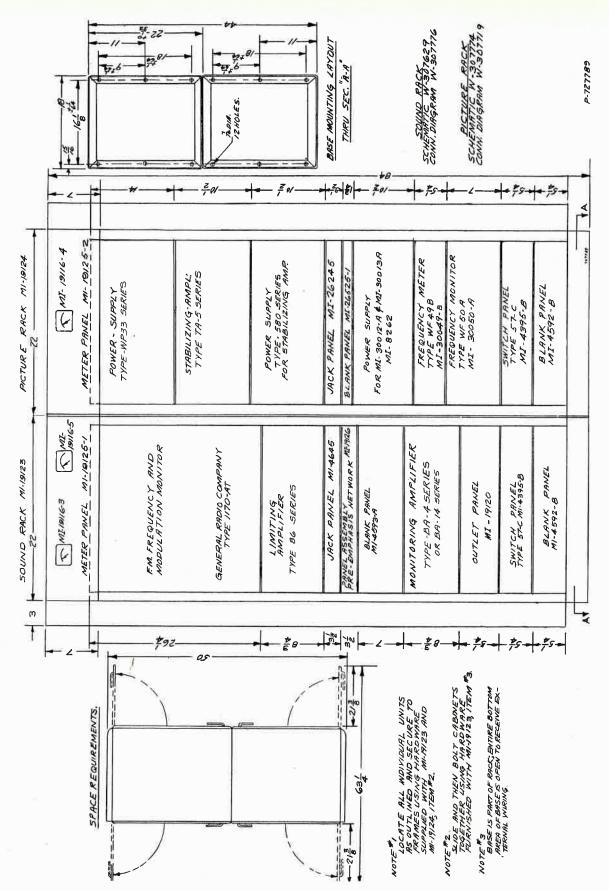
Outline, Monitoring Equipment Racks (727789-sub 13)
